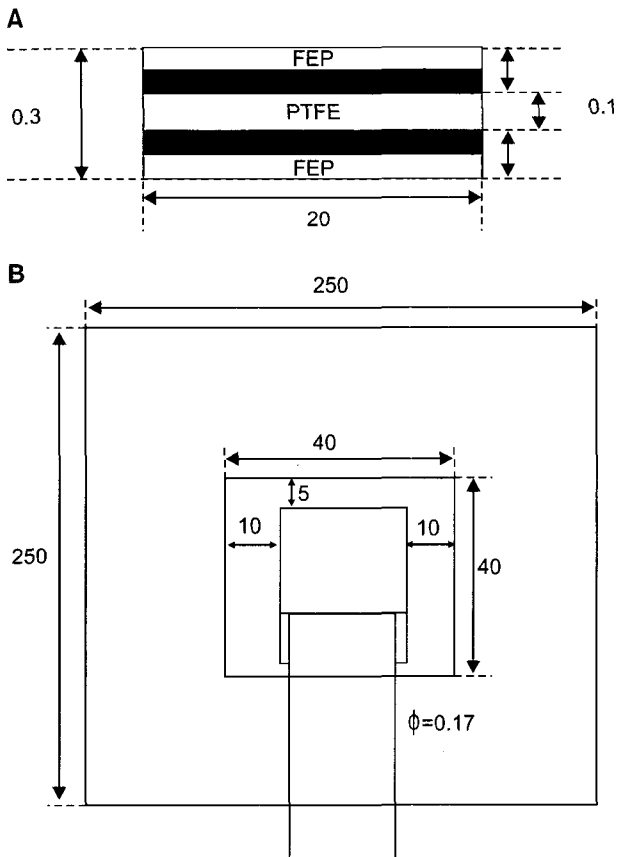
The dimensions of parallel-plate detector using dielectric films (unit: mm). (a) lateral side view, (b) The detector assembly.
